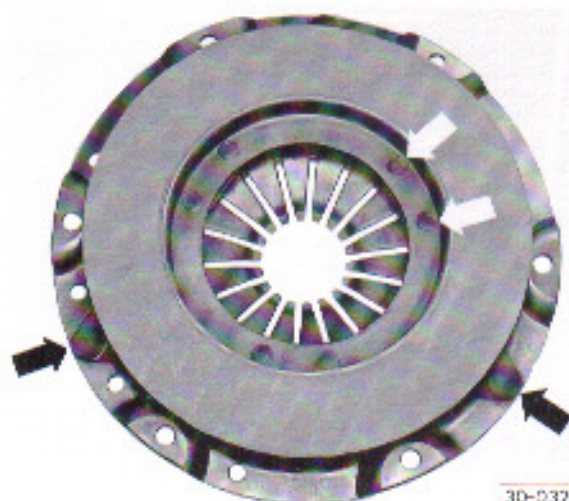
Check the spring connections between pressure plate and cover for cracks, and tightness of rivets
